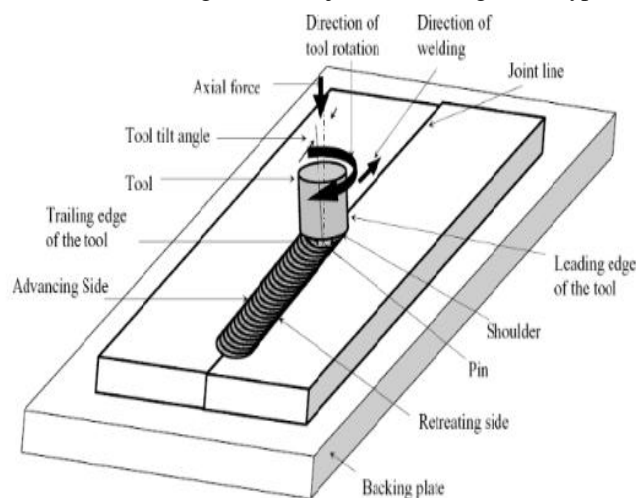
Basic Working Diagram of Friction Stir Welding[17]
